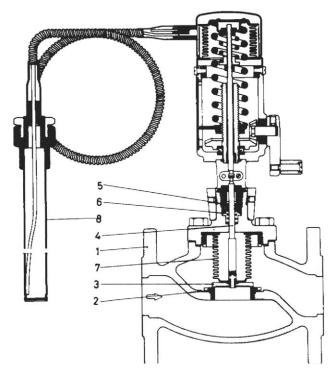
Flanged thermostatic control valve *Courtesy of Danfoss A/S
